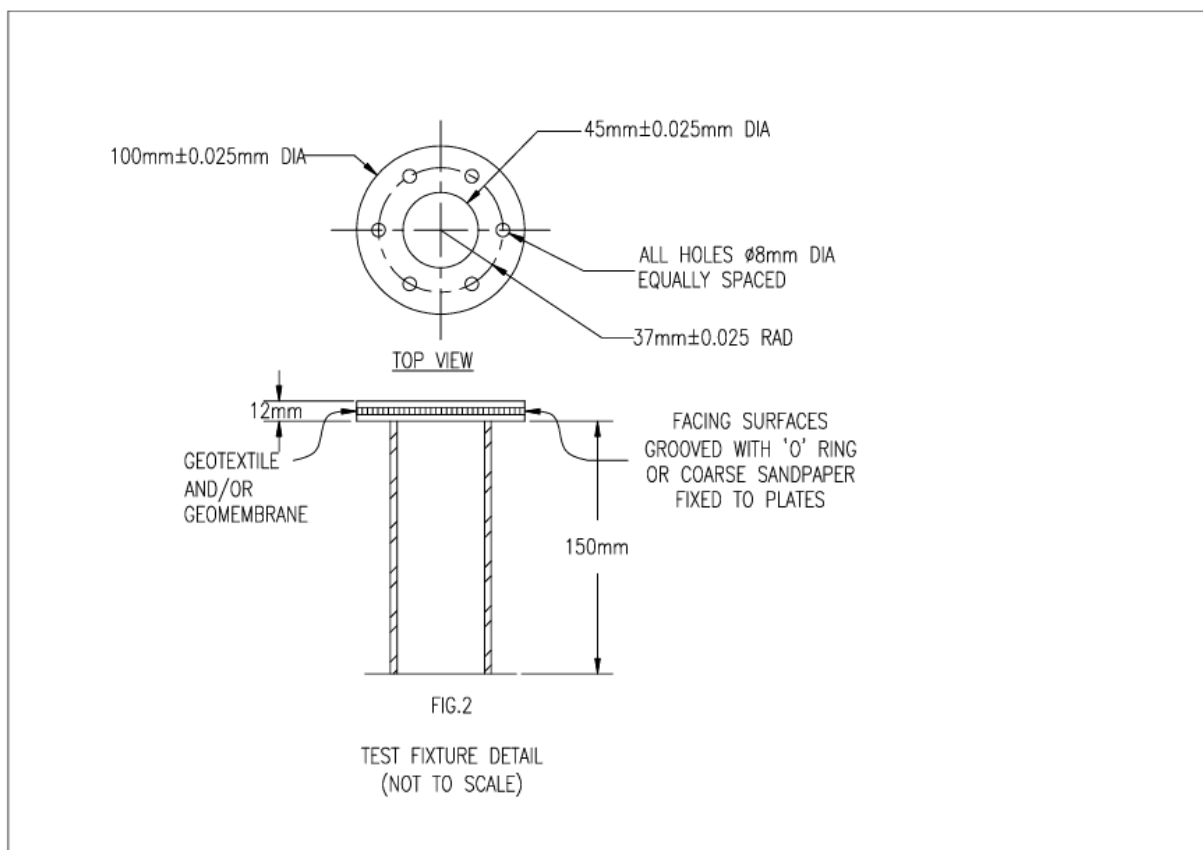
TEST FIXTURE DETAIL (NOT TO SCALE)
